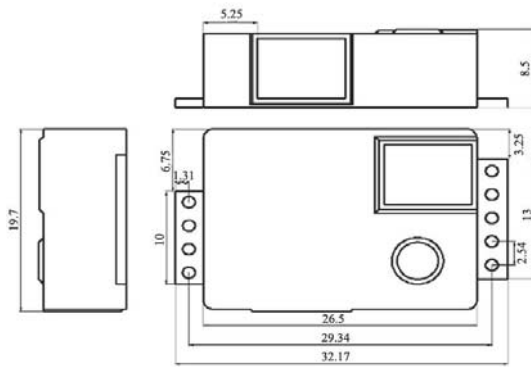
MH-Z19 module dimensions with measures in millimeters.
